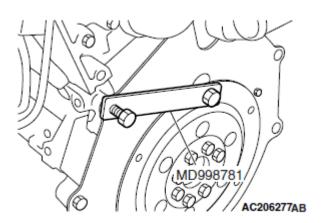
Securing Drive Plate Using Special Tool MD998781 Courtesy of MITSUBISHI MOTOR SALES OF AMERICA.
